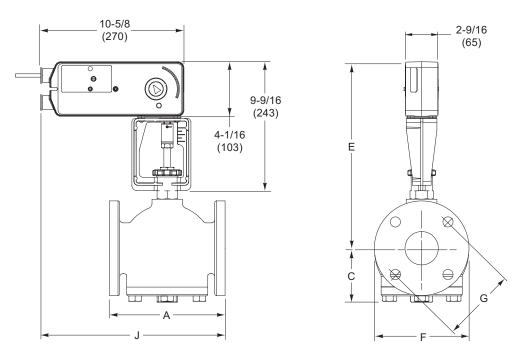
Mx61-720x with 2-1/2" to 4" N.C. 2-Way VB-9313 Flanged Globe Valve.
